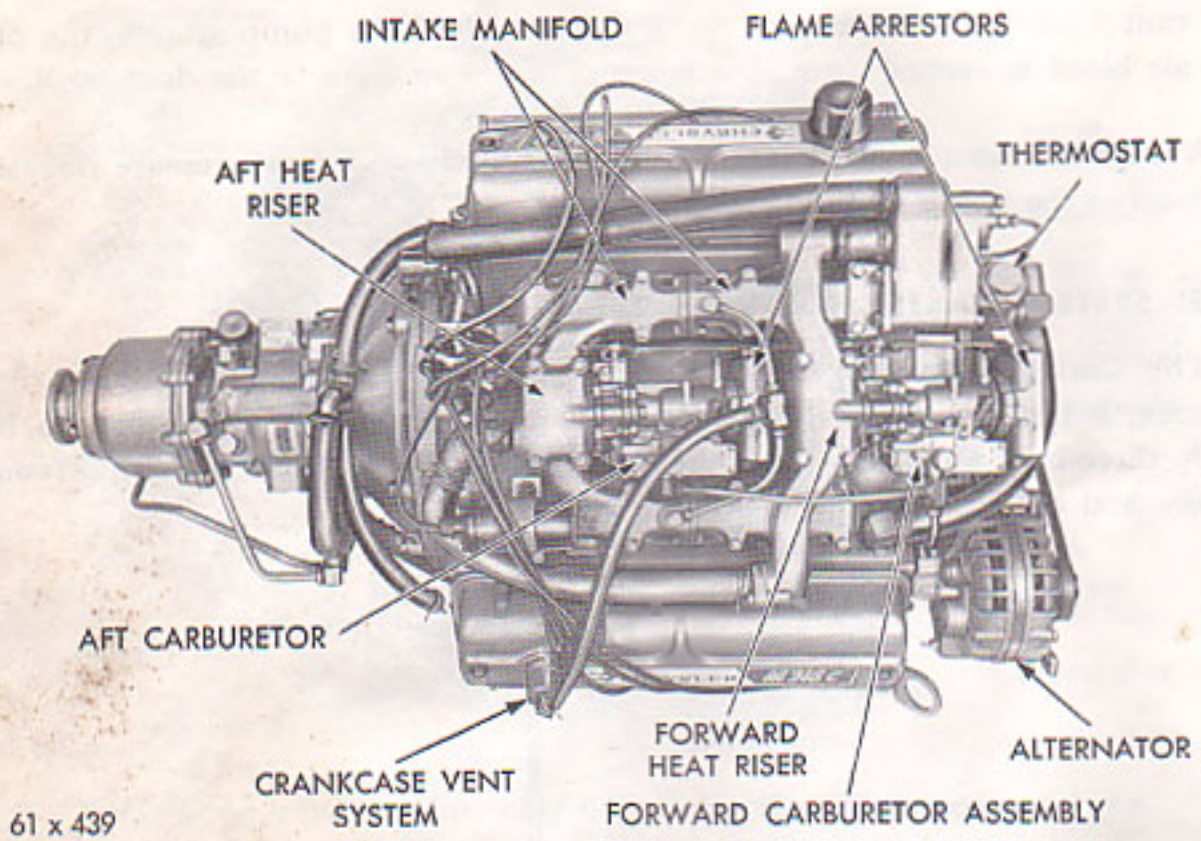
Intake Manifold and Carburetor Installed Model M-318C (Typical)
